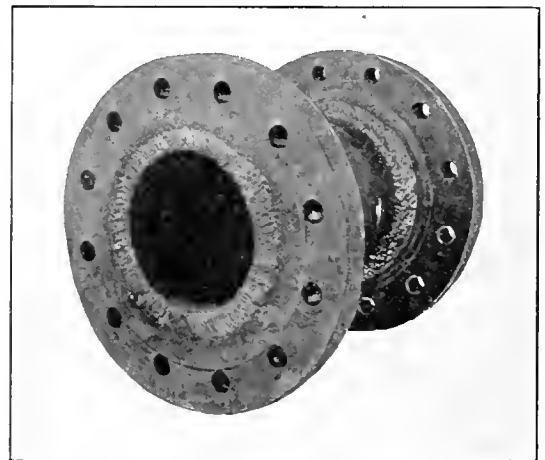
PIPE AND FLANGE WITH WELD COMPLETE
